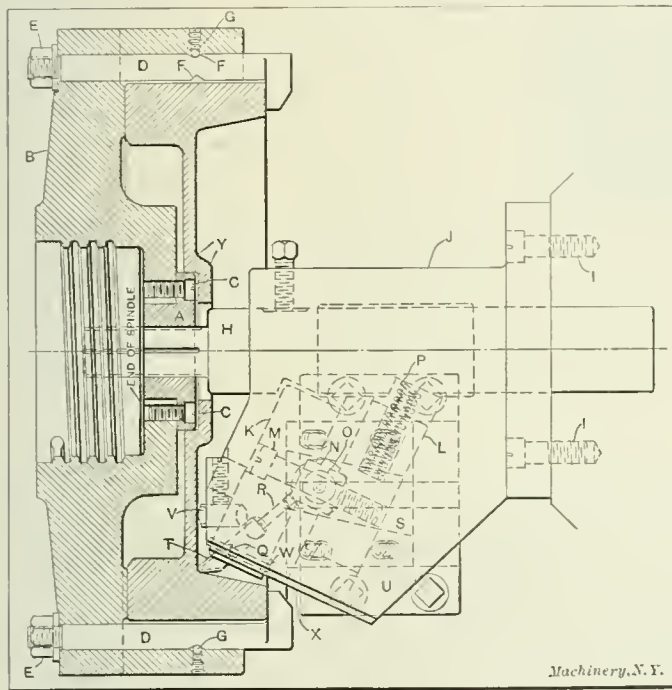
Details of Chuck and Taper Boring-tool used in the Second Operation
